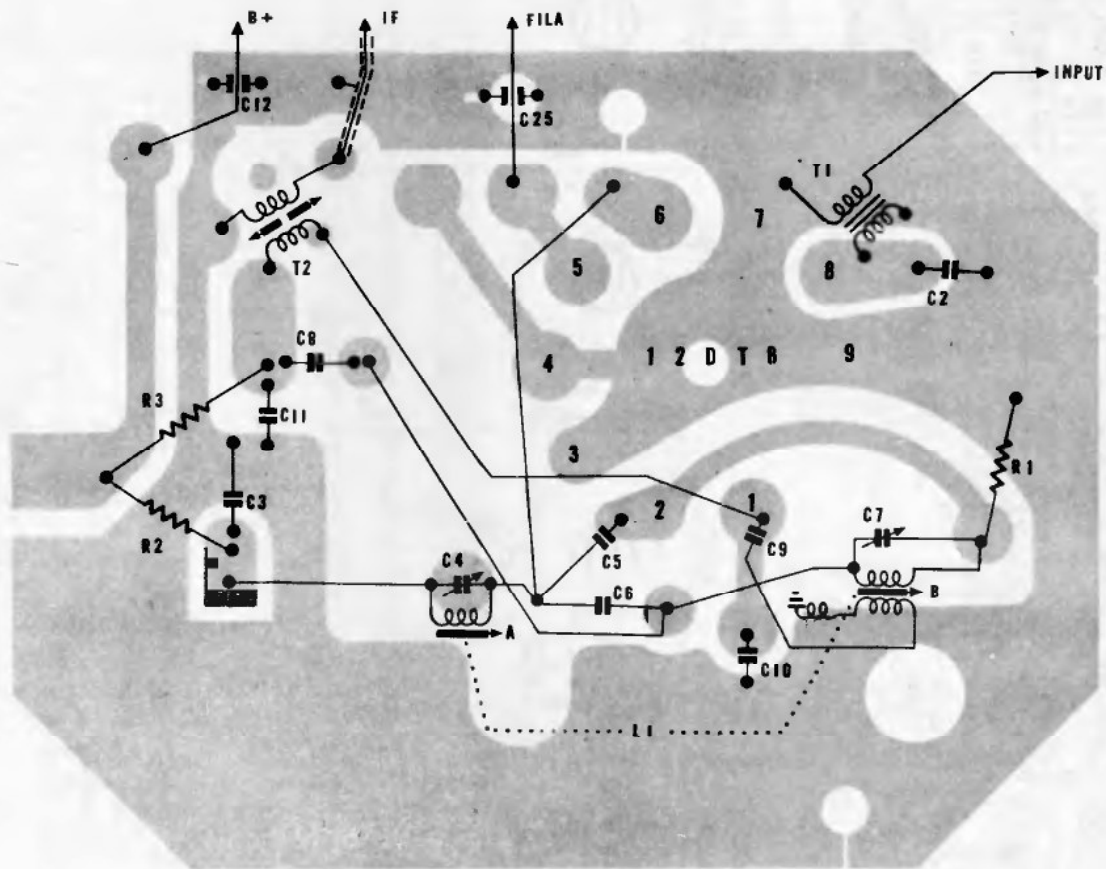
Bottom view of printed circuit chassis with components shown symbolically
